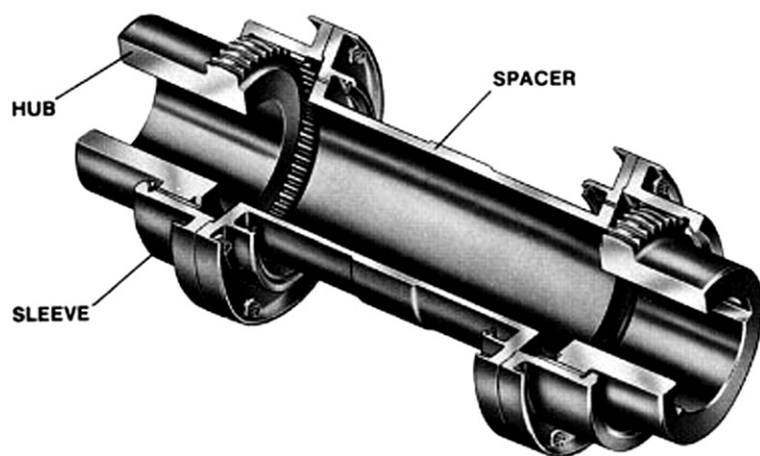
• Continuously lubricated gear type coupling with spacer (Courtesy of Zurn Industries)
